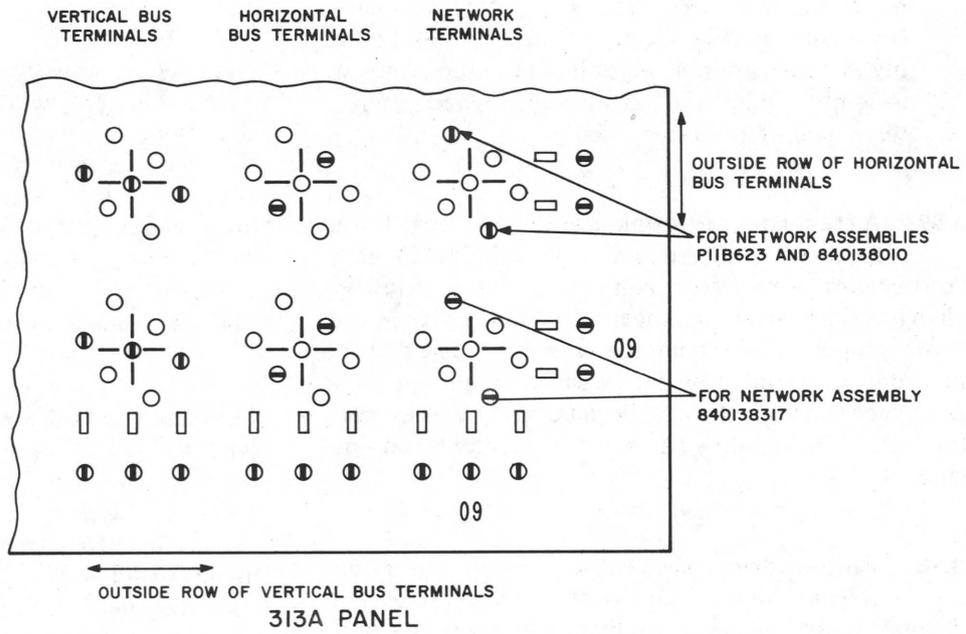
View of Terminal Ends—Lower Right Corner Shown
